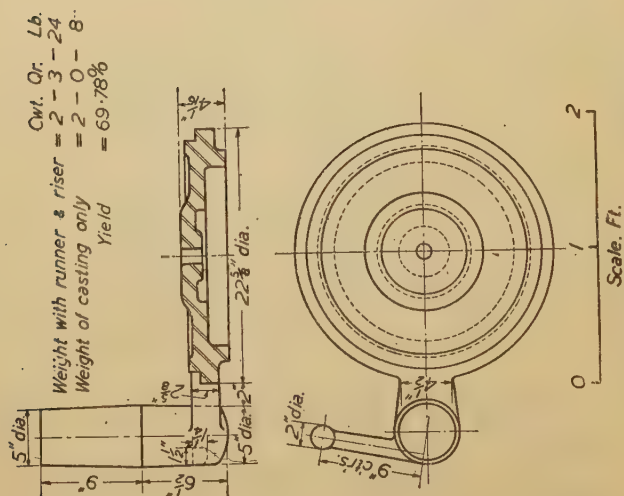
Whirl-Gate Feeder for Steel Flywheel
